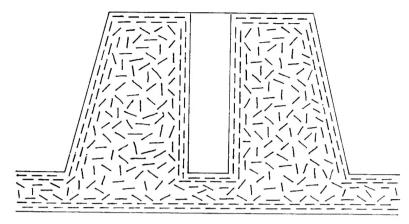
Section through boss with molded-in hole indicating fiber alignment
